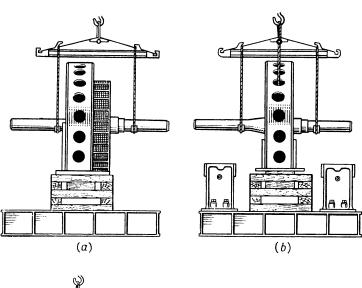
illustrates the procedure of introducing a short-shaft rotor into a stator with the aid of an extension shaft.
